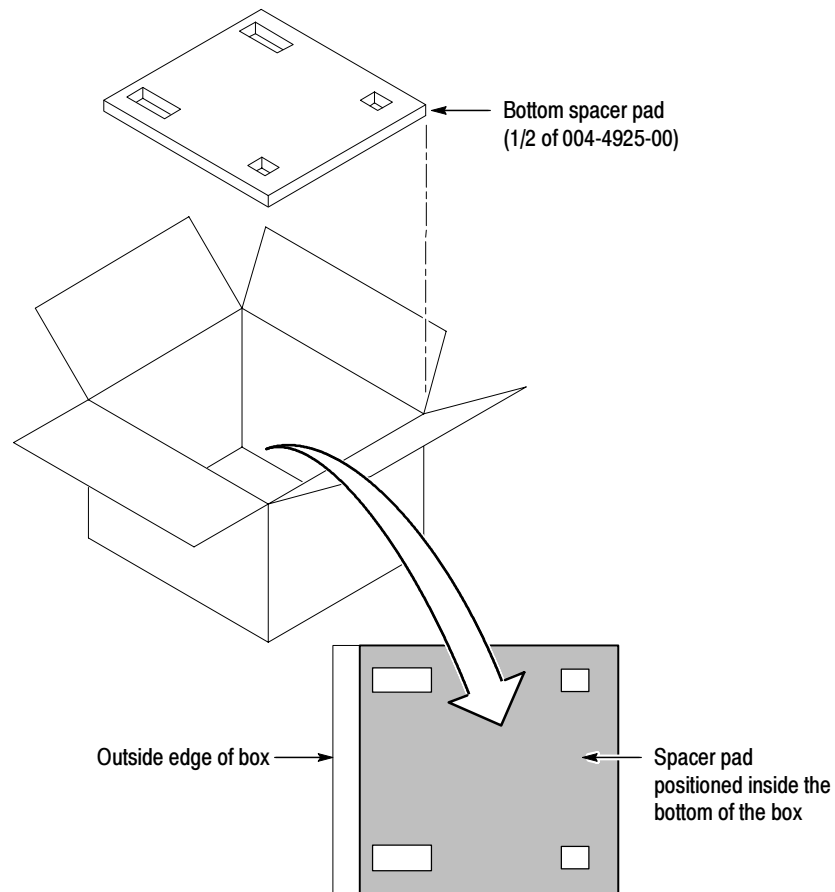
Placement of bottom spacer pad in inner shipping box
